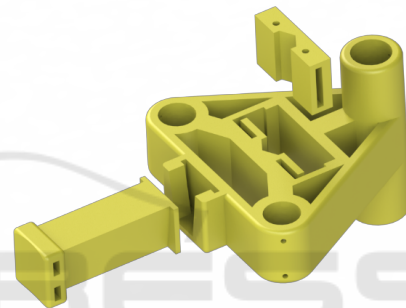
The three plastic parts of the carriage. The bushings, springs, and split nut are not shown.
